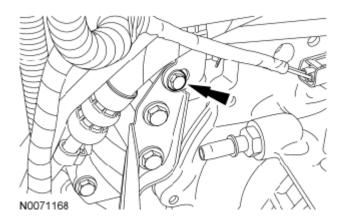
Locating Wire Harness Retainer And Transaxle Fluid Indicator Tube
